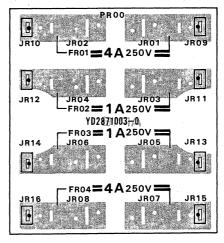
Fuse Board — PR01 Component Assembly Diagram
